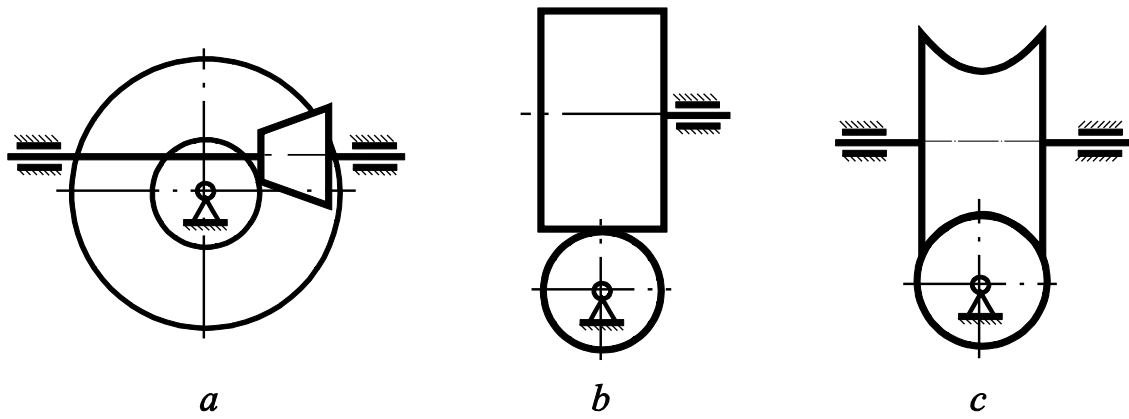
Hyperboloid gearings: *a* – hypoid gearing; *b* – screw gearing;
